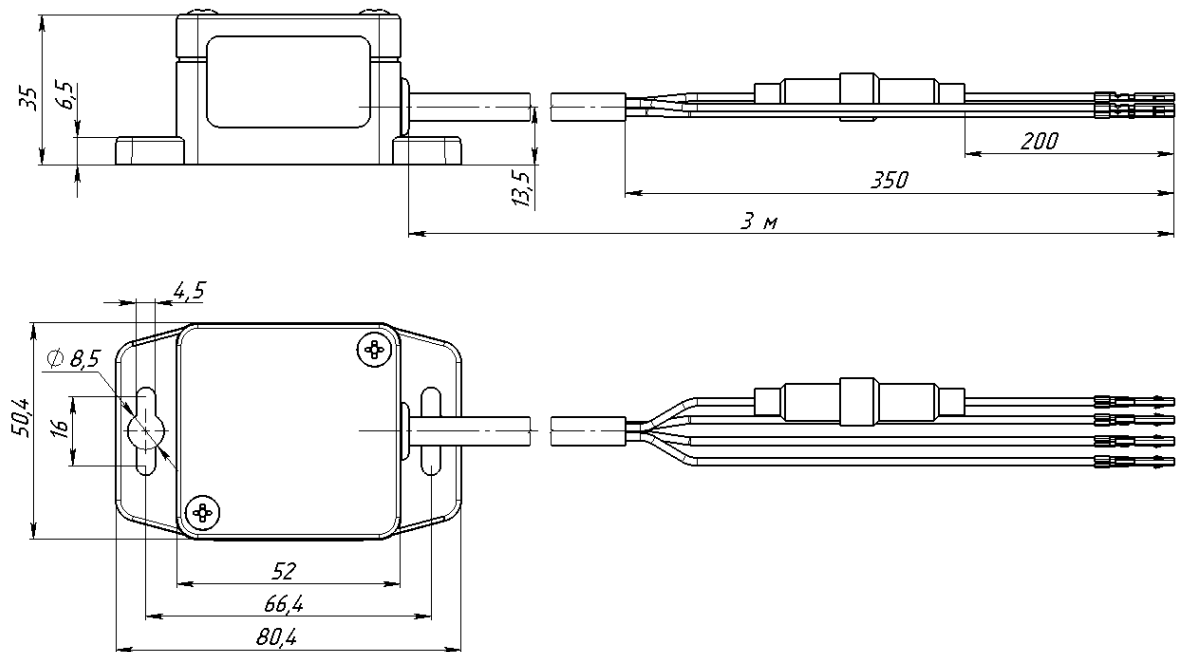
Dimensional drawing and connection dimensions of the Reader BTRx models (with fuse holder)
